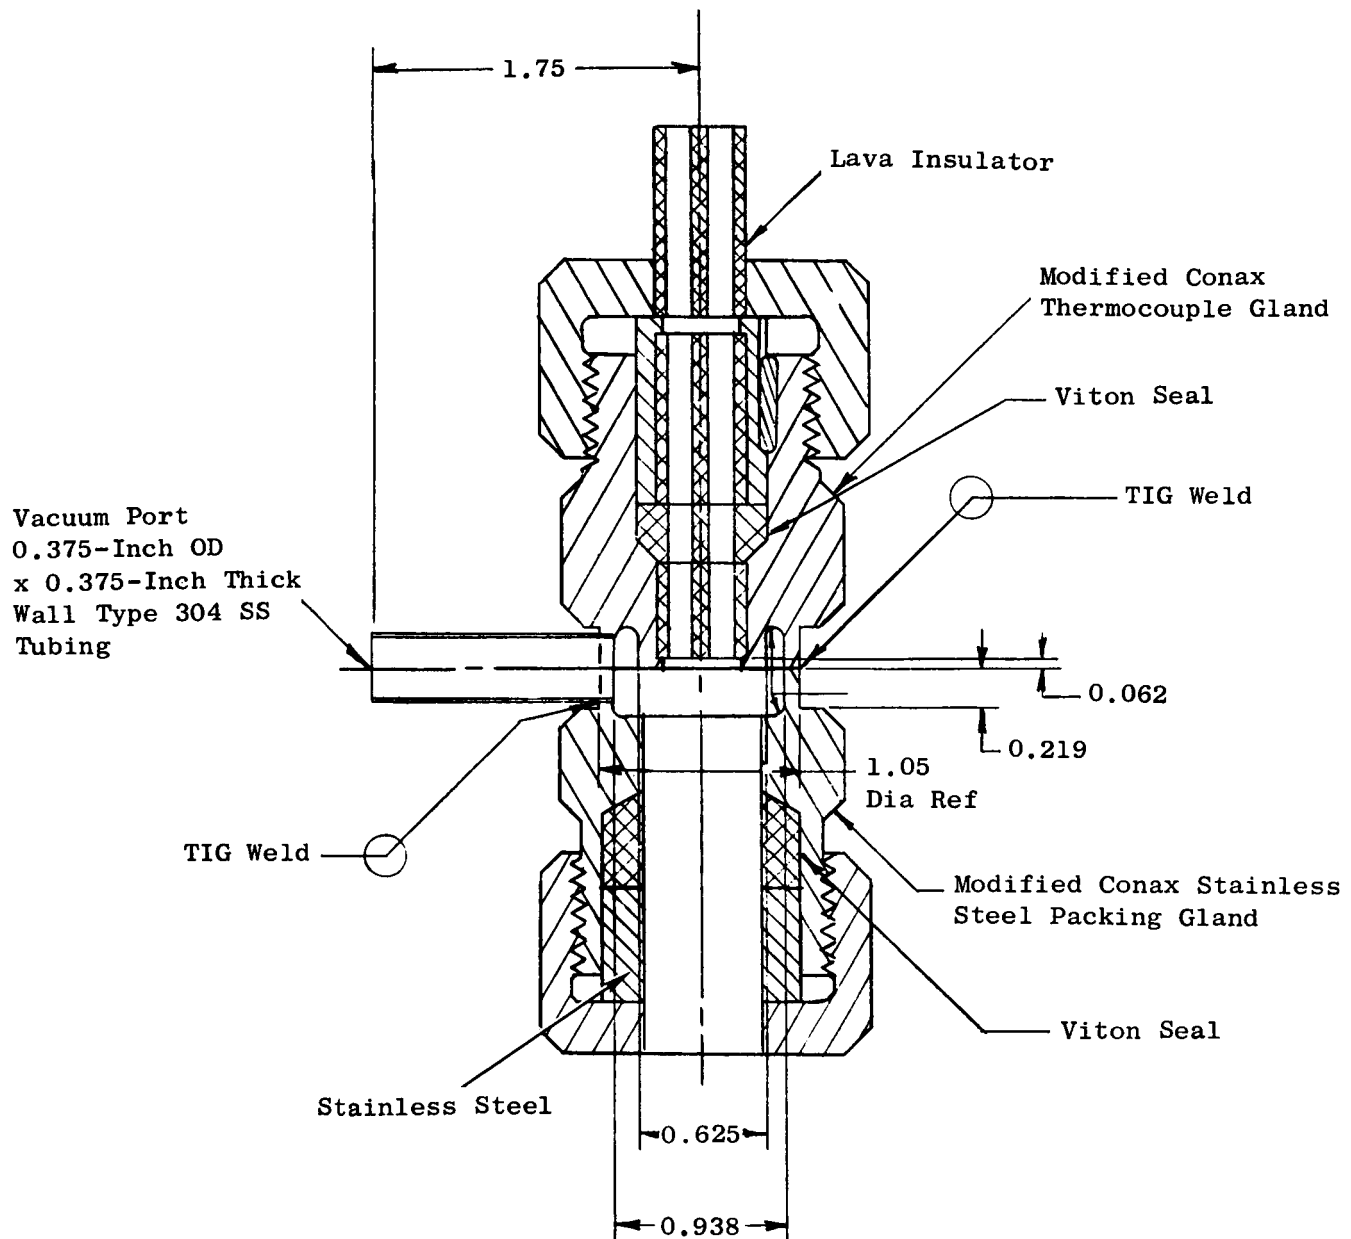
Power Feedthrough Fitting for Potassium Conductive Immersion Heater. The Primary Vacuum Seal to the System is Made by Means of a Conflat Flange Welded to the Conduit Tube.
